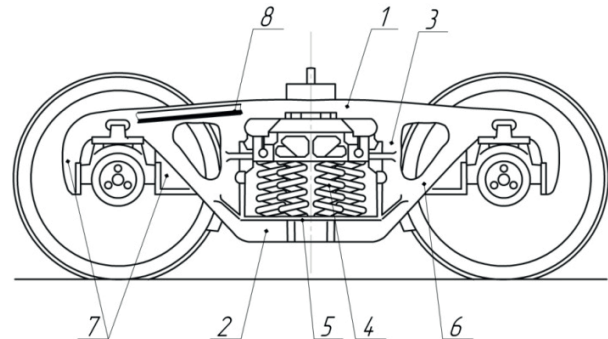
Pre-stressed side frame of a three-piece bogie concept
